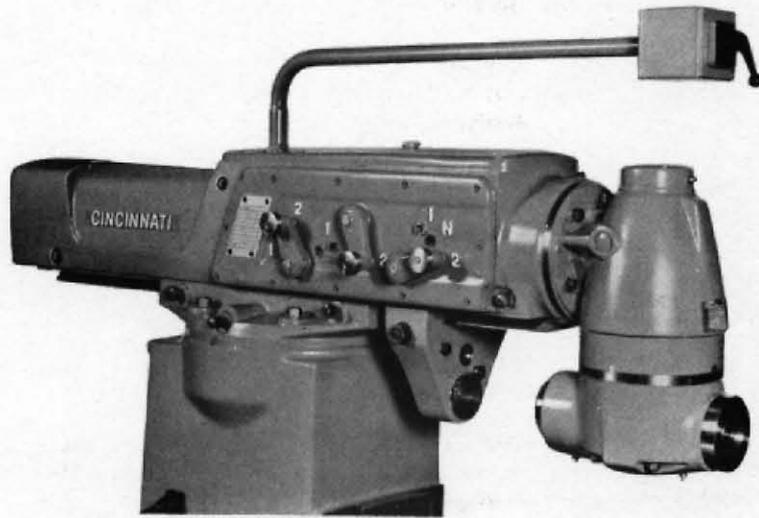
/1 3 HP Heavy Duty Overarm and HV Head
